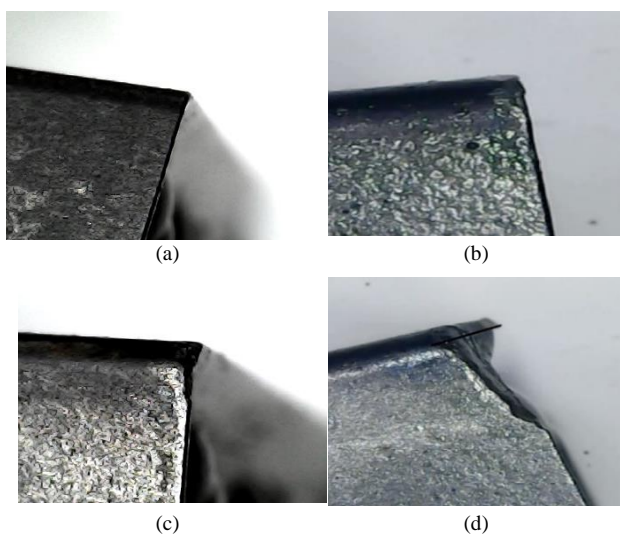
(a) new condition; (b) good condition; (c) middle condition; (d) poor condition
